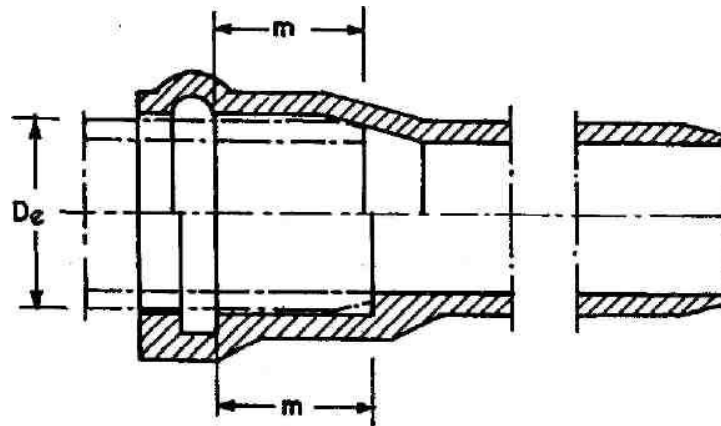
MINIMUM DEPTH OF ENGAGEMENT
